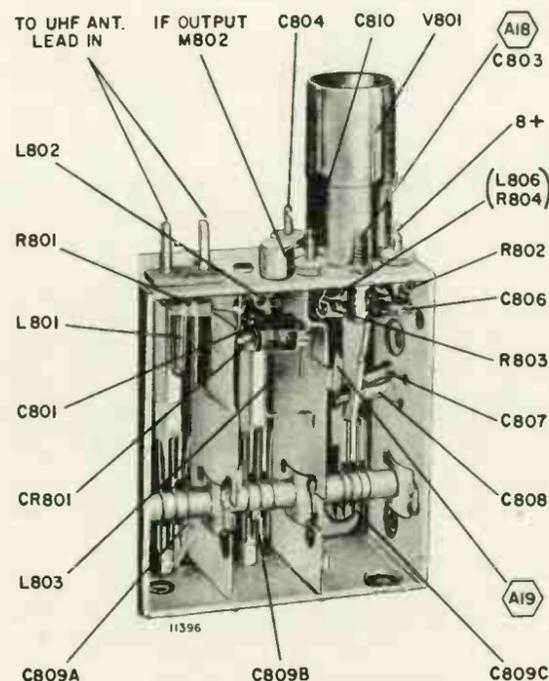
Side View of UHF Tuner 94D162-3 with Cover Removed. Location of components and adjustments shown.
